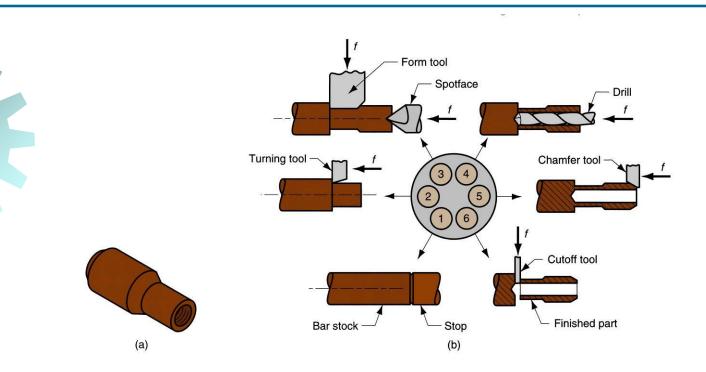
(a) Part produced on a six-spindle automatic bar machine; and (b) sequence of operations to produce the part: (1) feed stock to stop, (2) turn main diameter, (3) form second diameter and spotface, (4) drill, (5) chamfer, and (6) cutoff.
